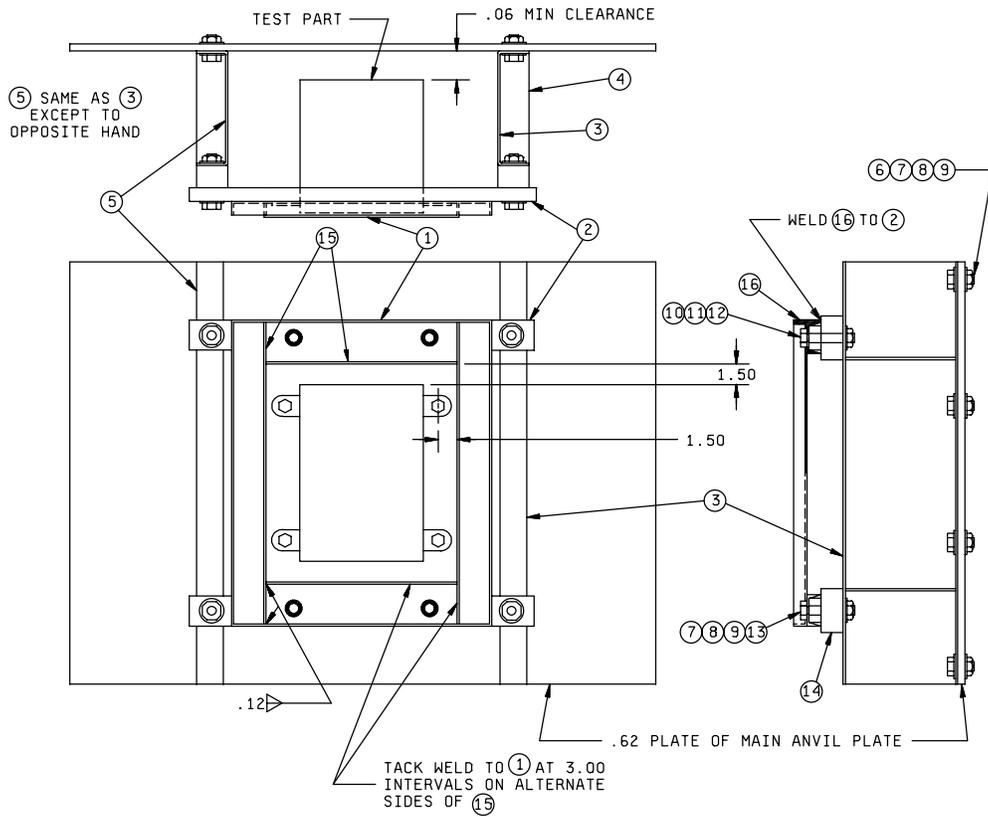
B. Standard mounting fixtures for electrical-indicating switchboard meters and other panel-mounted parts.
